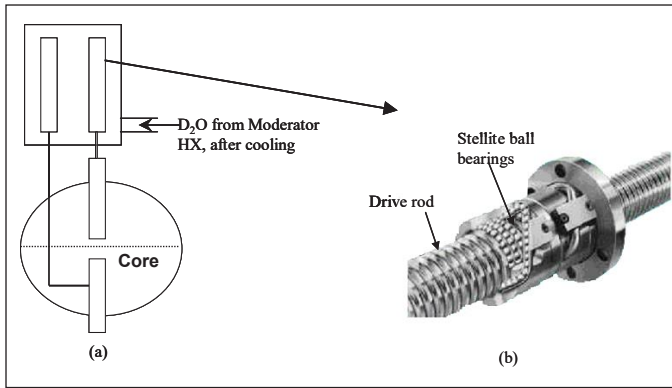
(a) Schematic of adjustor rod drive assembly and (b) Ball screw mechanism
